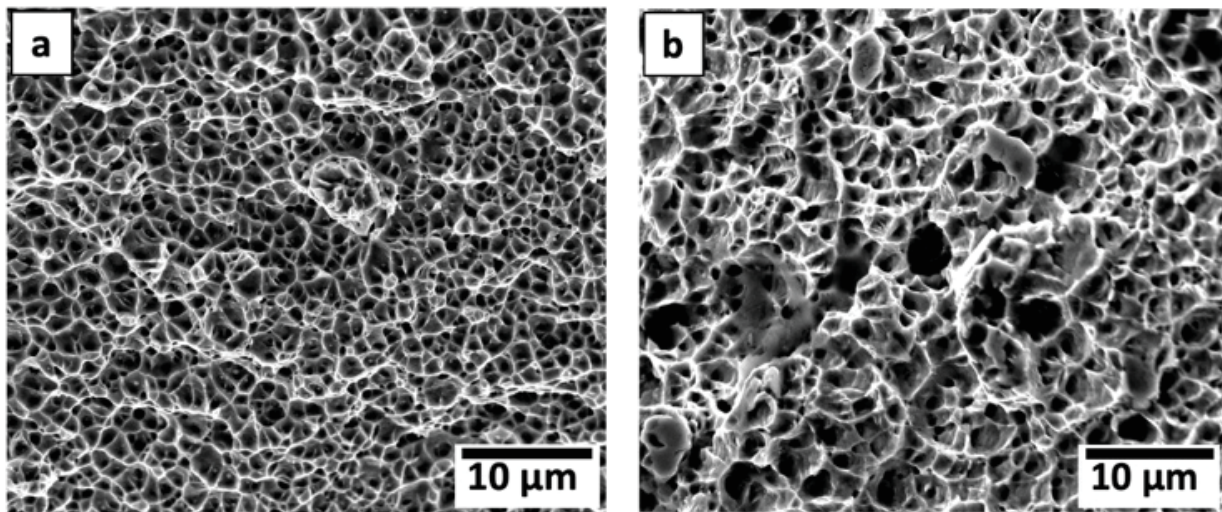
SEM Fractography microstructure of fractured surface of (a) 600A, 0.2s and (b) 800A, 0.2s
